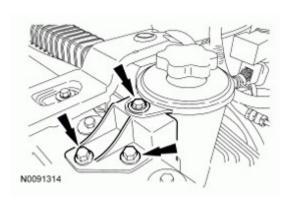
Locating Power Steering Reservoir Aside And Bolts Courtesy of FORD MOTOR CO.
